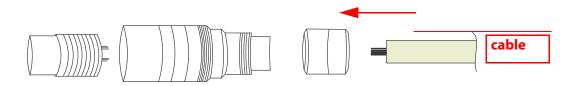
Inserting of a cable in the rear part of the connector
